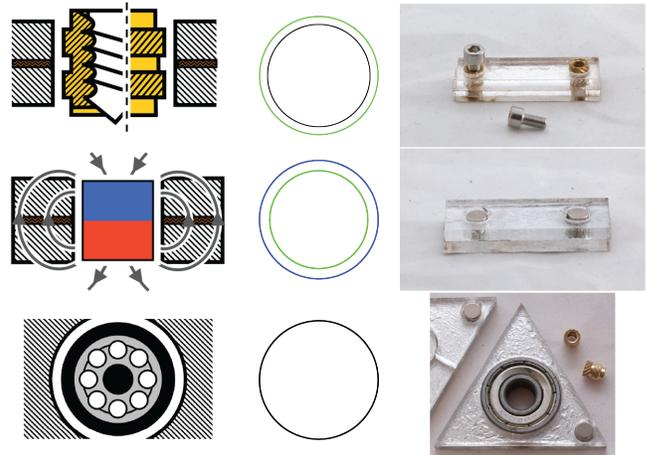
Example of external connectors used in LaCir to assemble separate layers while continuing the structural circuit: screw inserts (top), neodymium magnets (middle), ball bearings (bottom).
